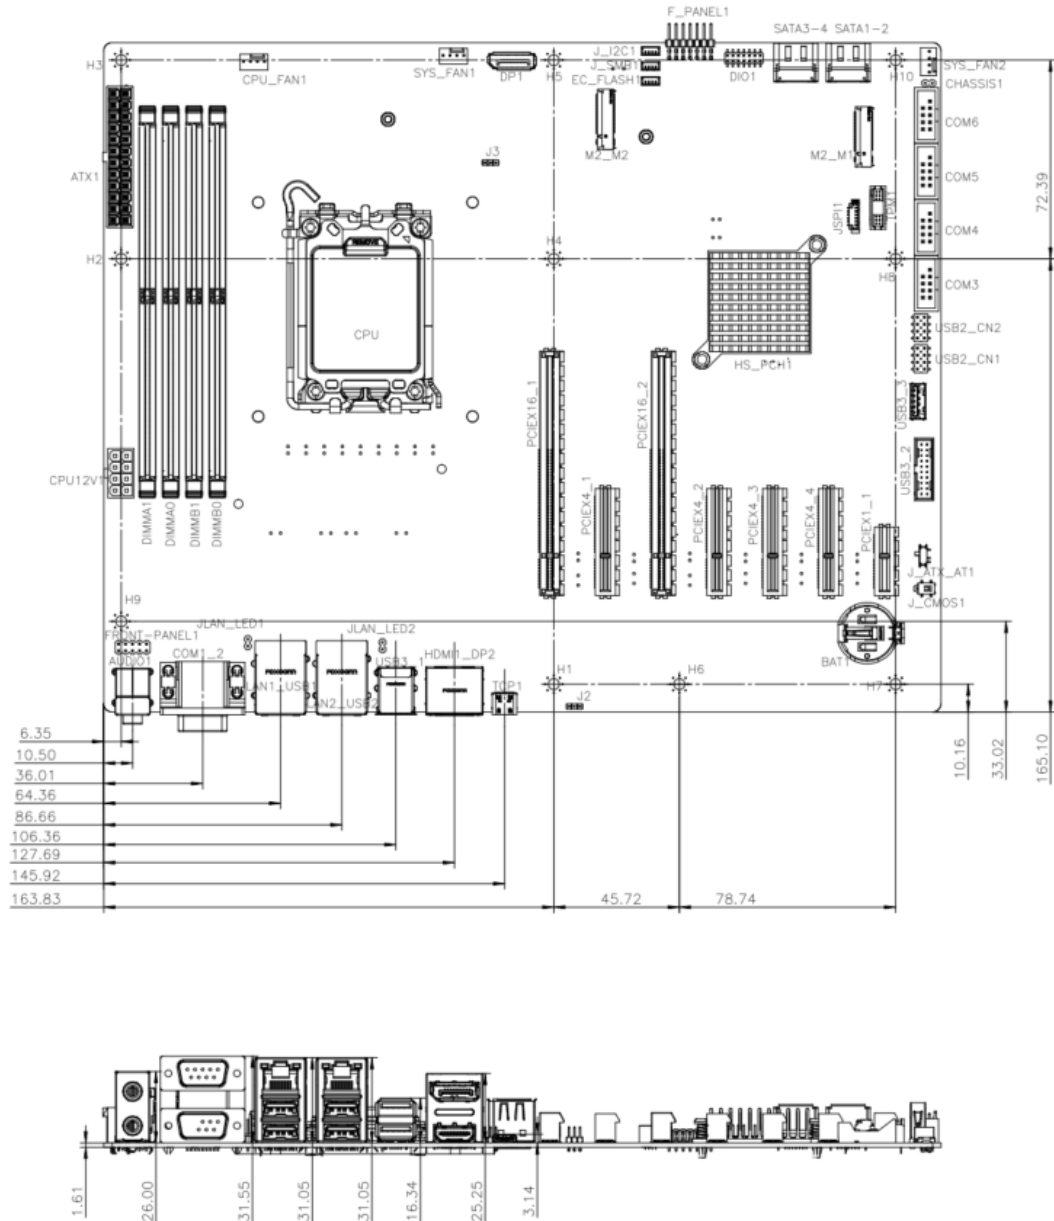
IMBA-ARL-Q870 Dimensions (mm)
